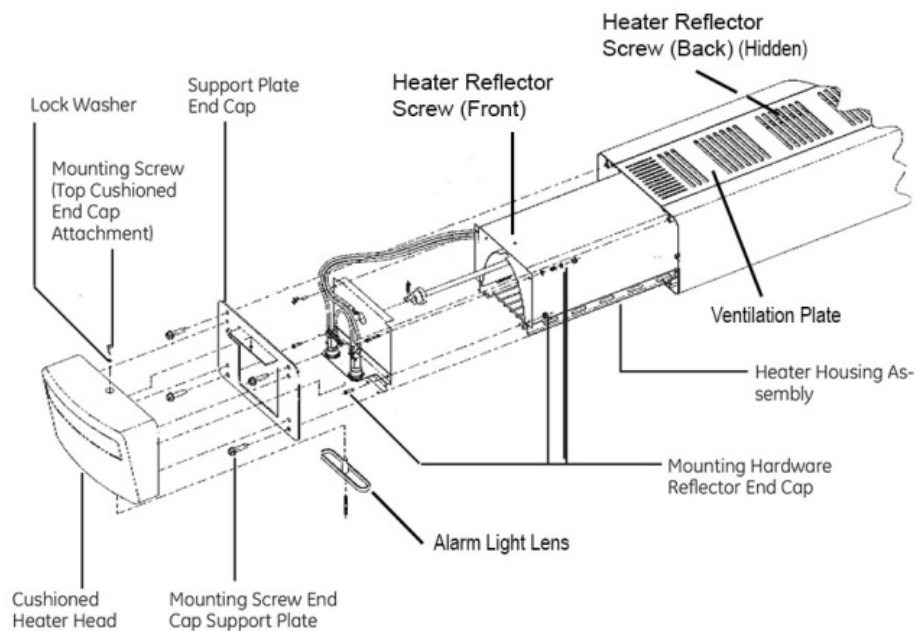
Heater Head Assembly – Units with HCC Serial Numbers
